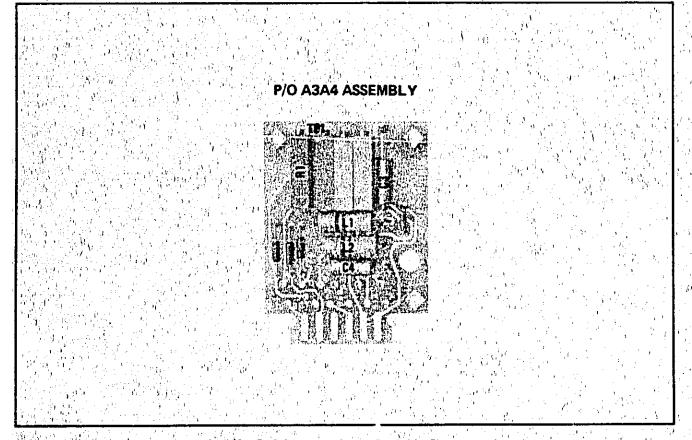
P/O A3A4 Connector Board Assembly Component Locations
